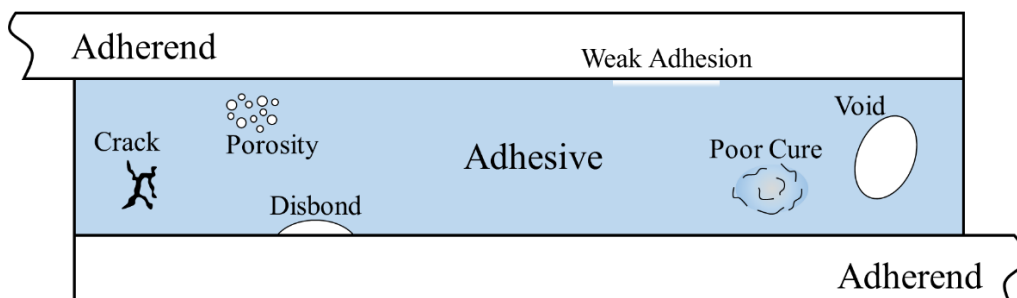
Typical defects of the adhesive layer in an adhesive joint.
